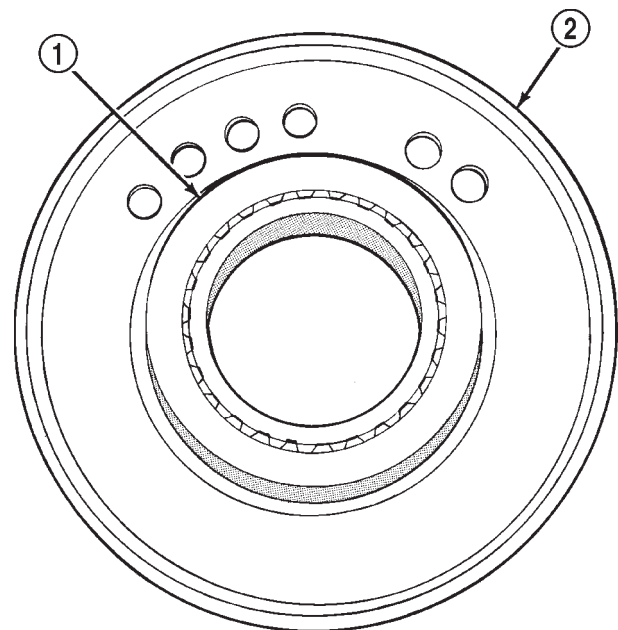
Overrunning Clutch Race Position On Low-Reverse Drum
